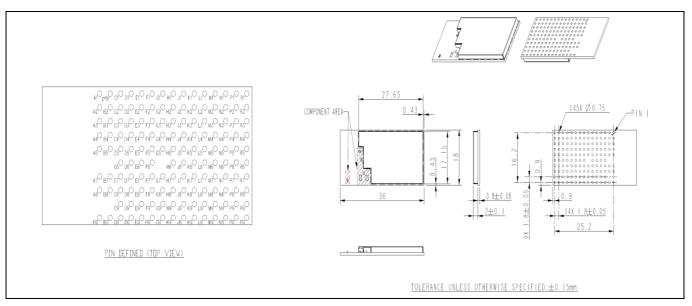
CCM top view PCB layout footprint (unit in mm, diameter = 0.75 mm solder mask defined)
